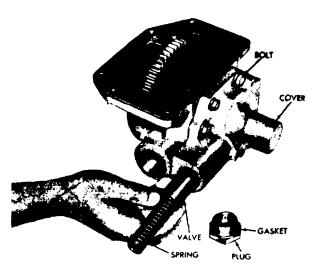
C-28. Removing (or Installing) Converter Pressure Regulating Valve
